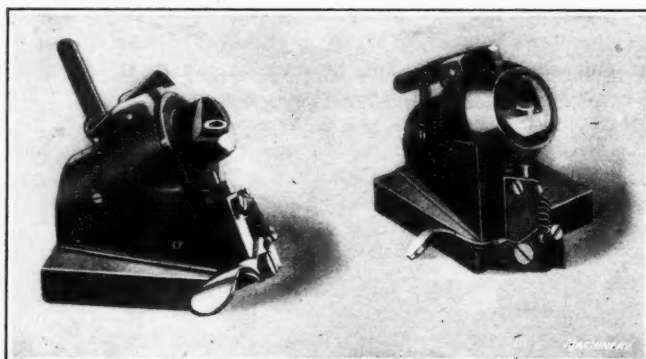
Two Views of Jigs used for drilling Flash Hole in Top Ring
